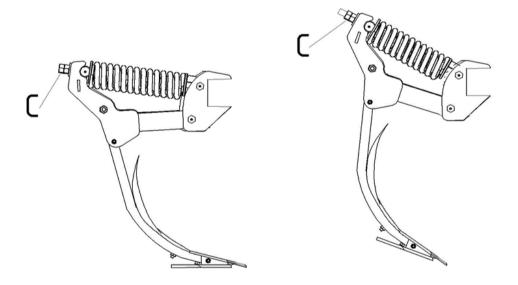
Adjustment of tooth tilt with the spring-type protection.
